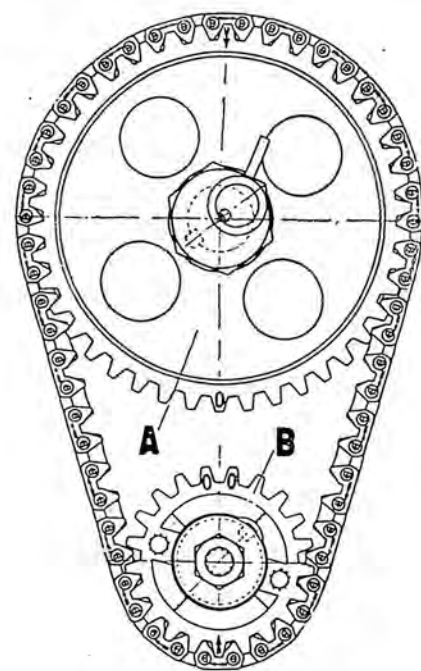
Cam Shaft Driving Sprockets and Chain.
